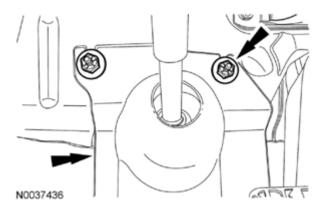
Locating Steering Joint Cover And Nuts Courtesy of FORD MOTOR CO.
